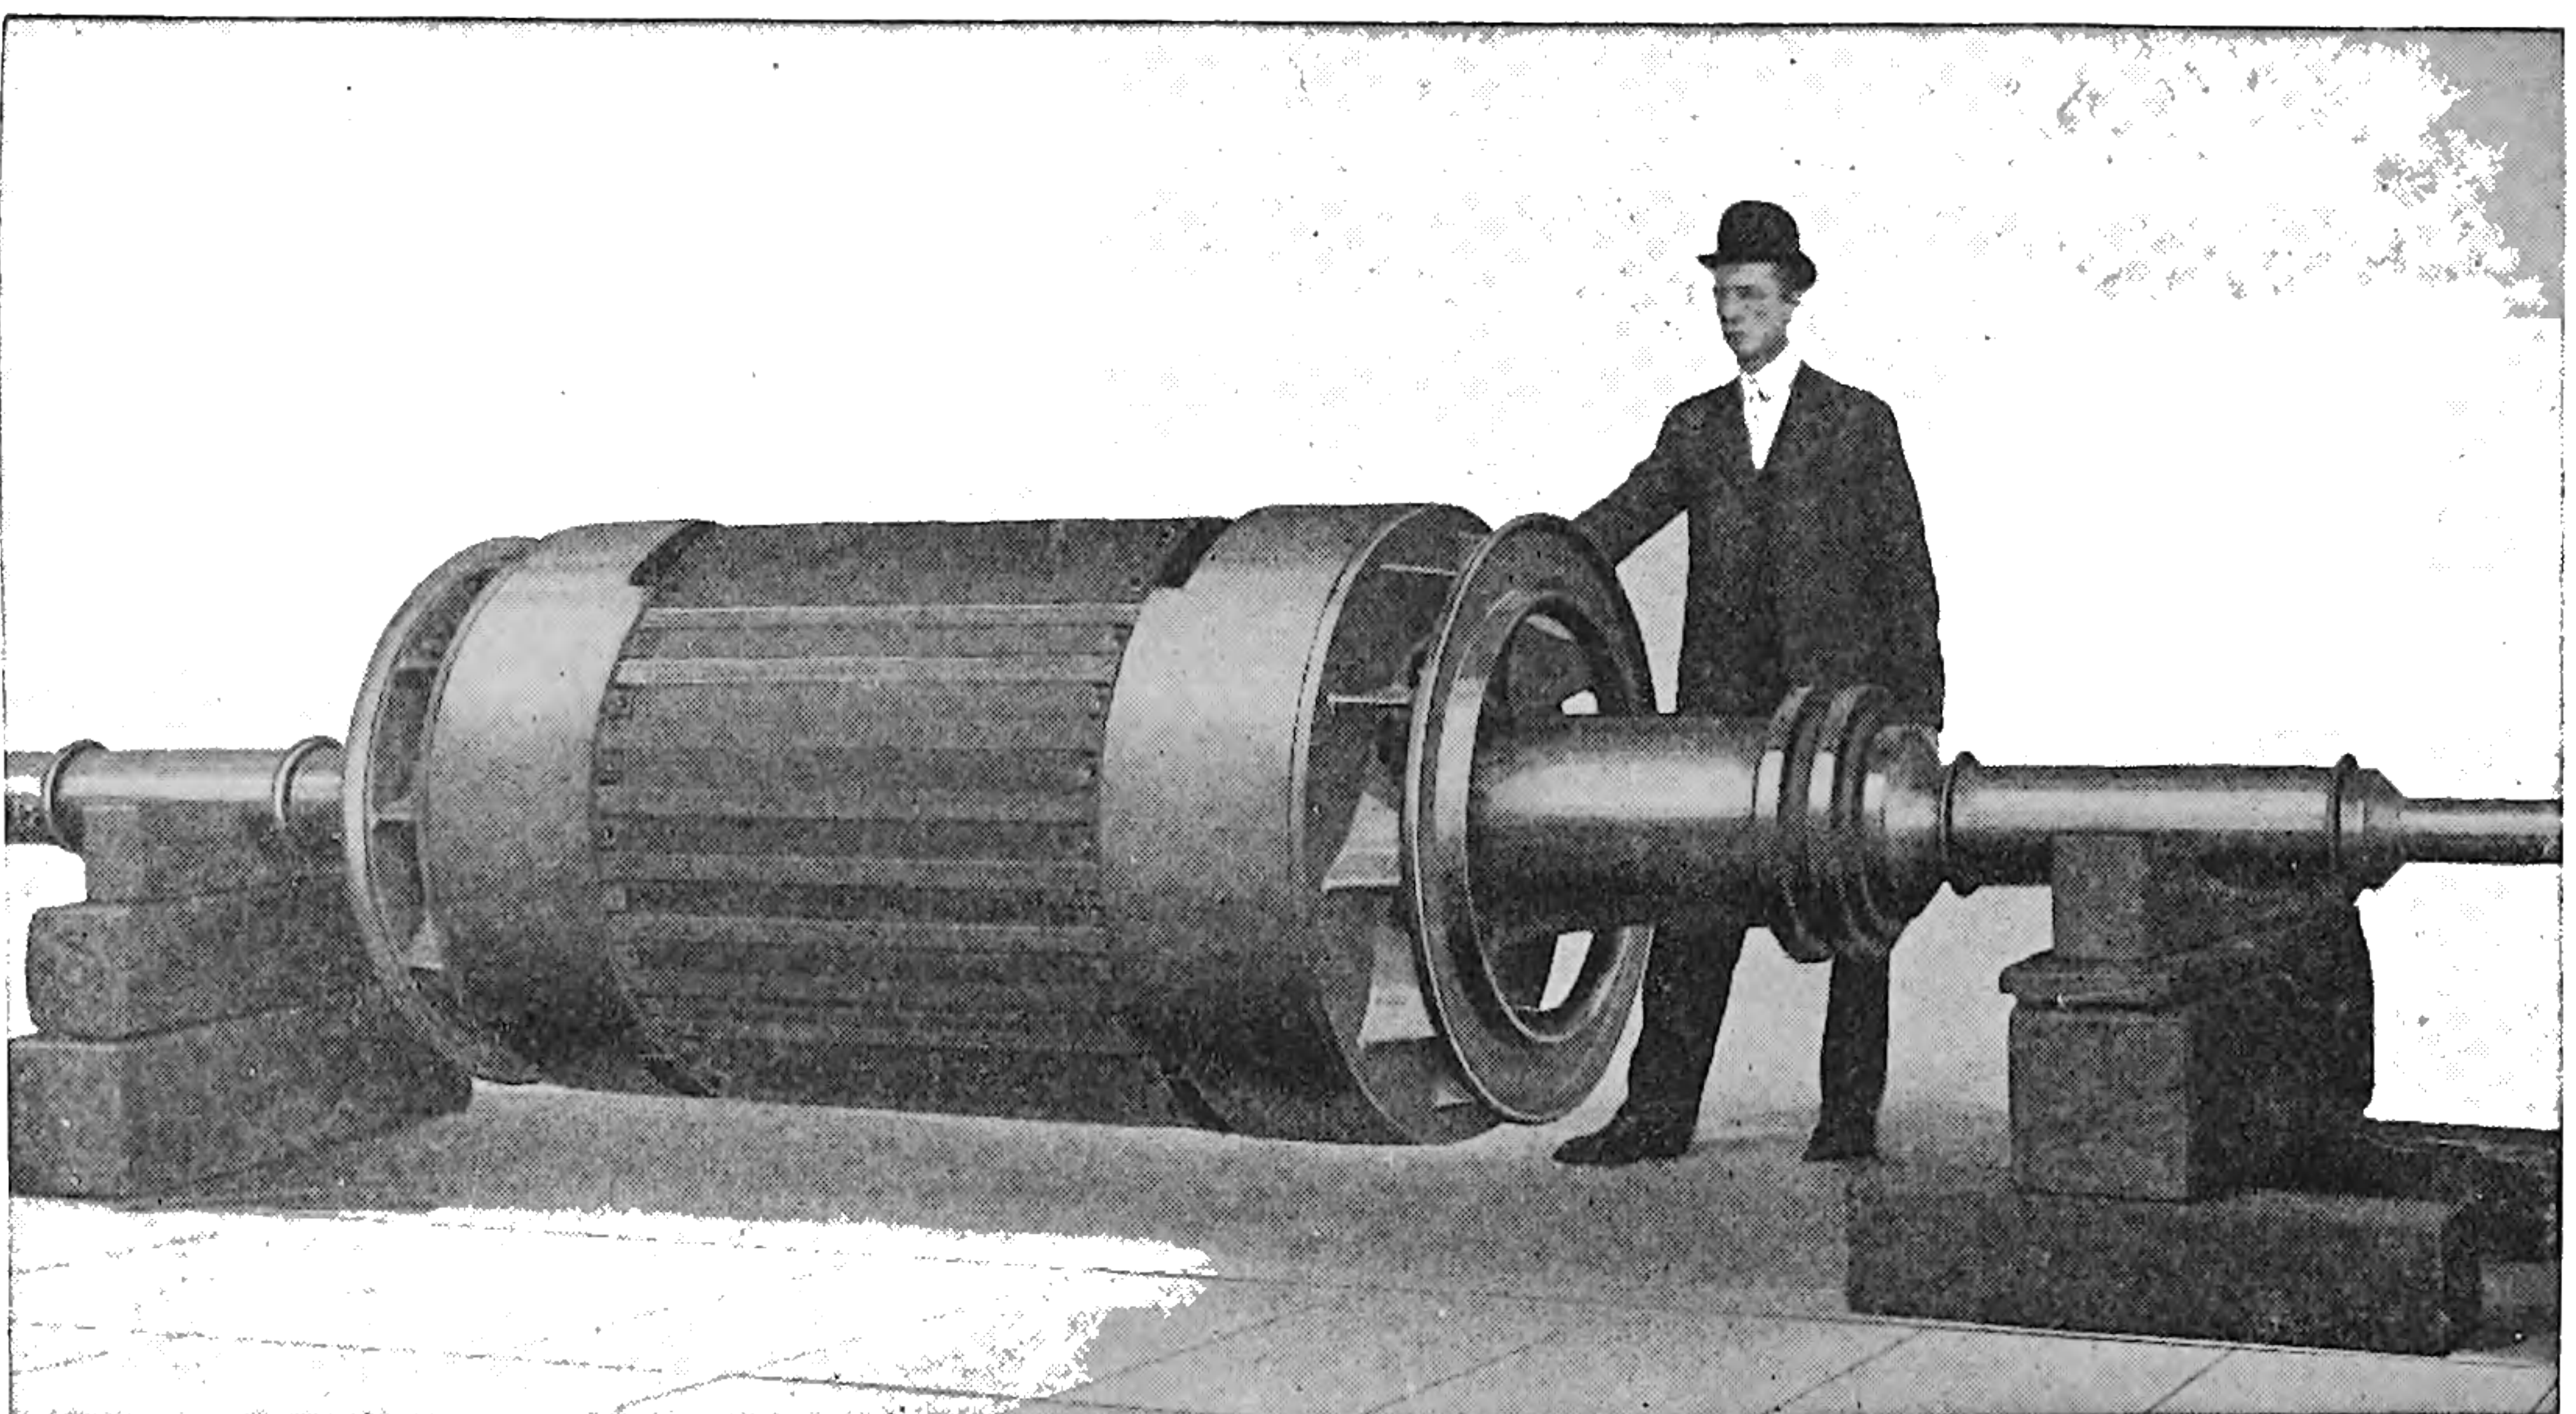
Rotor of 3500 K. V. A. Three-Phase Crocker-Wheeler Turboalternator
